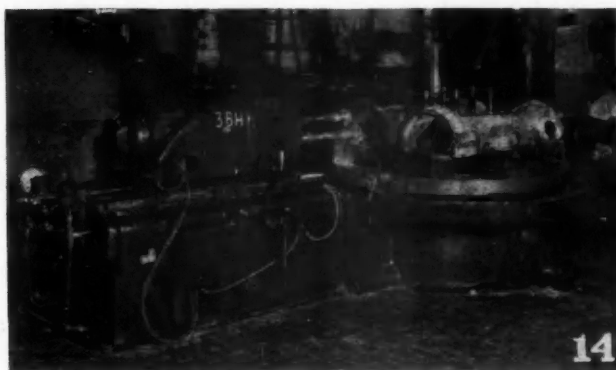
W. F. & J. Barnes rotary table horizontal boring machine
